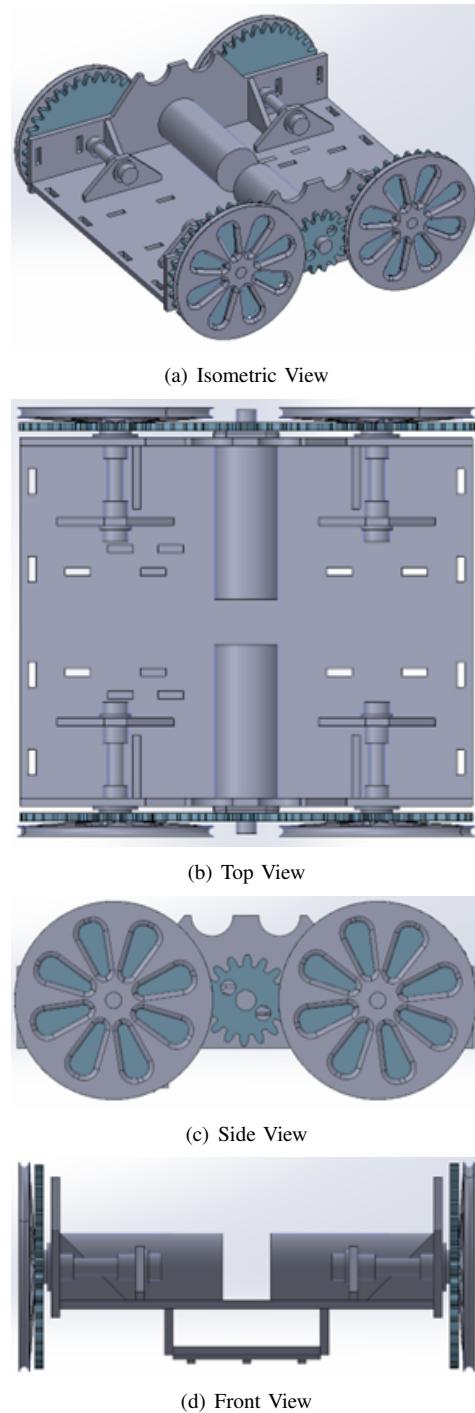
Principle views of the Bot robot's chassis model designed in SolidWorks.
